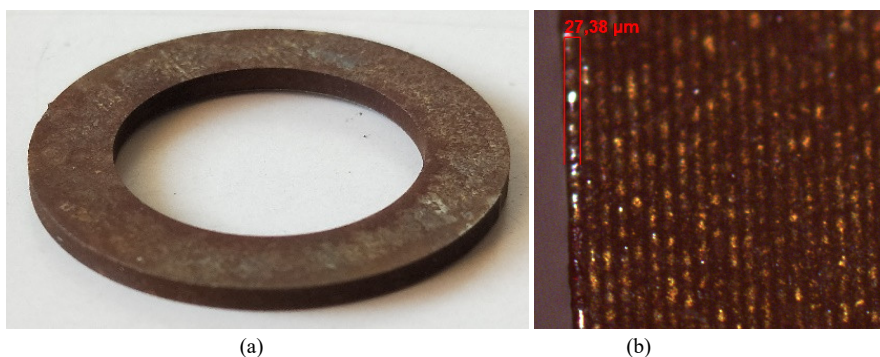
AMM core cut by WEDM method. (a) Ring core. (b) Enlarged cutting contour.
